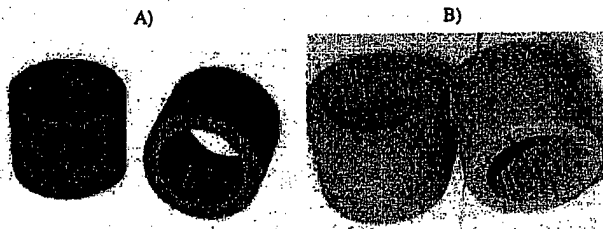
A) 3D-Printed wax pattern, B) Investment cast part.
